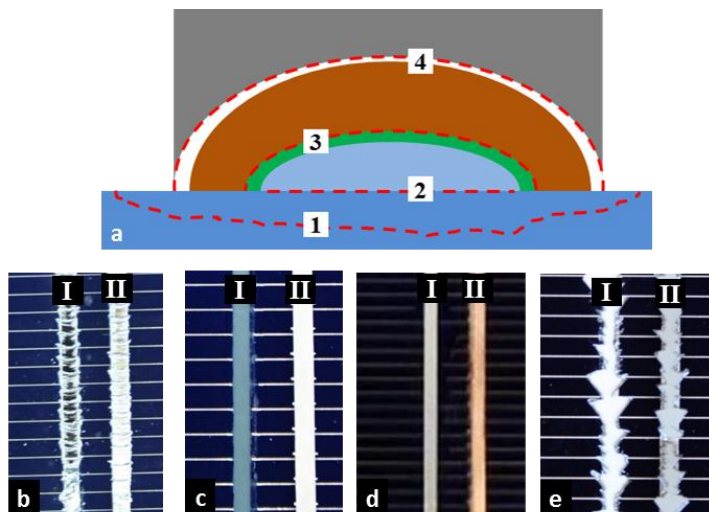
The observed contact failure positions (marked with red dashed lines) at the schematic drawing of a Ni-Cu-Ag front side metallization based on a printed seed-layer (a). Position 1: failure inside the silicon wafer (chipping), illustrated with a picture of the peeled contact area (b I) and the bottom side of a peeled ribbon (b II). Position 2: failure between the printed seed-layer and the silicon wafer illustrated in picture (c). Position 3: failure between plated nickel and plated copper illustrated in (d). Position 4: failure of the soldering joint. Picture e illustrates the breakage of the silicon wafer during the peel-force test.
